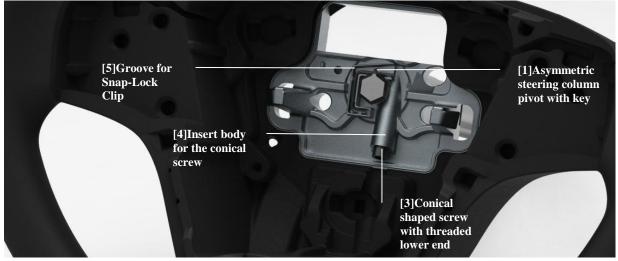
Final concept; securing of steering wheel: Inside of the steering wheel when mounted onto the steering column pivot.
